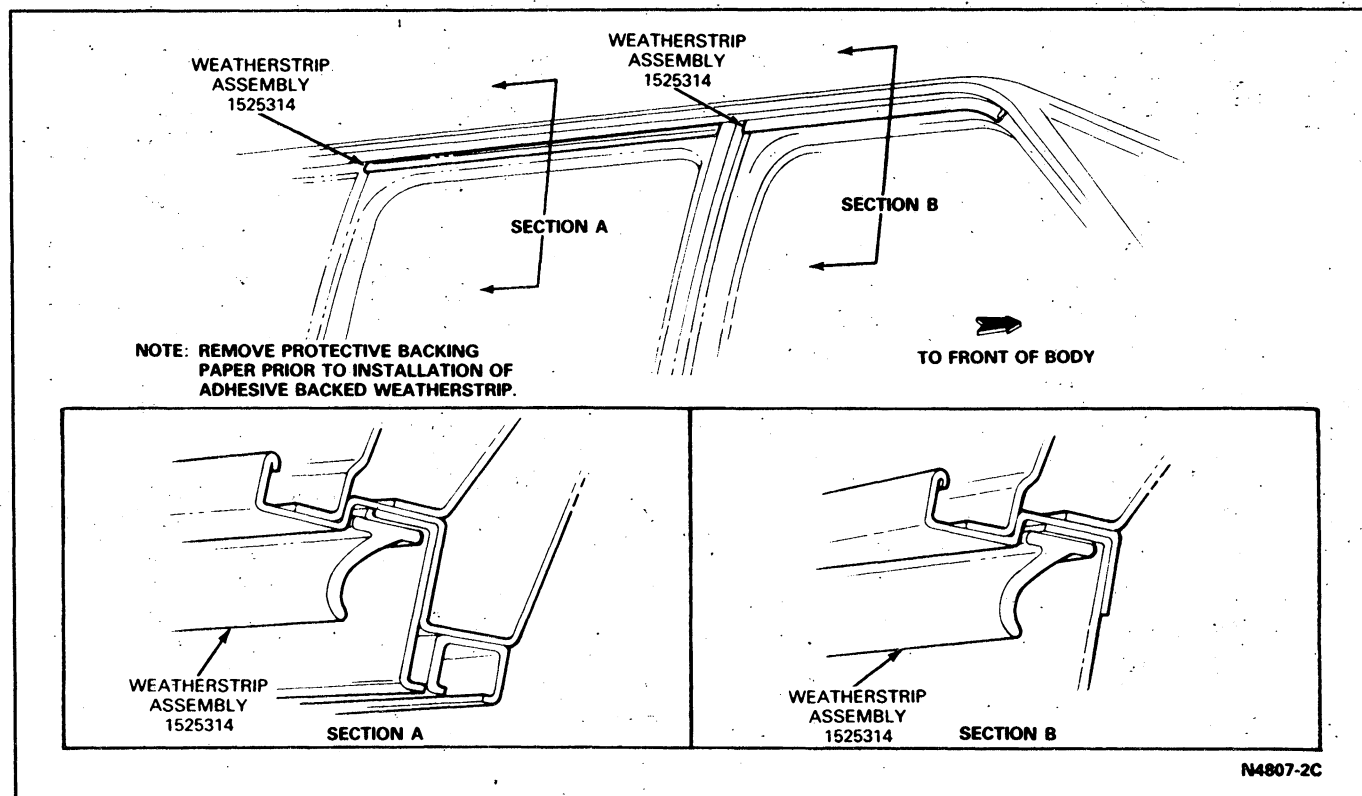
Body Side Door Opening Weatherstrips—E-150—E-350
